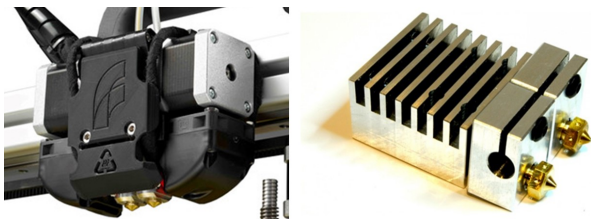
Examples of dual head and hot end with one heat sink [E3D 2014]
